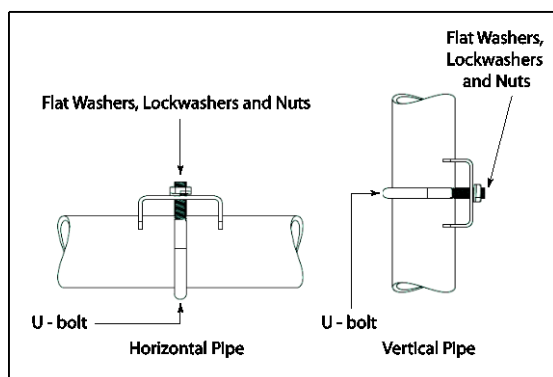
Pipe Mounting Bracket Secured to a Horizontal or Vertical Pipe
